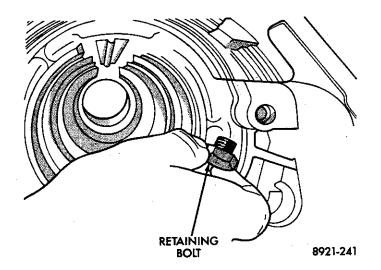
Removing Parking Pawl Shaft Retainer Bolt
